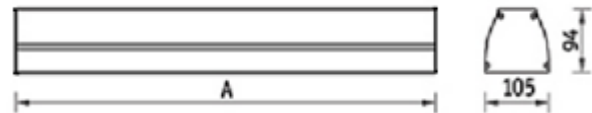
Overall dimensions of the lighting fixture assembled in a line (without caps)
